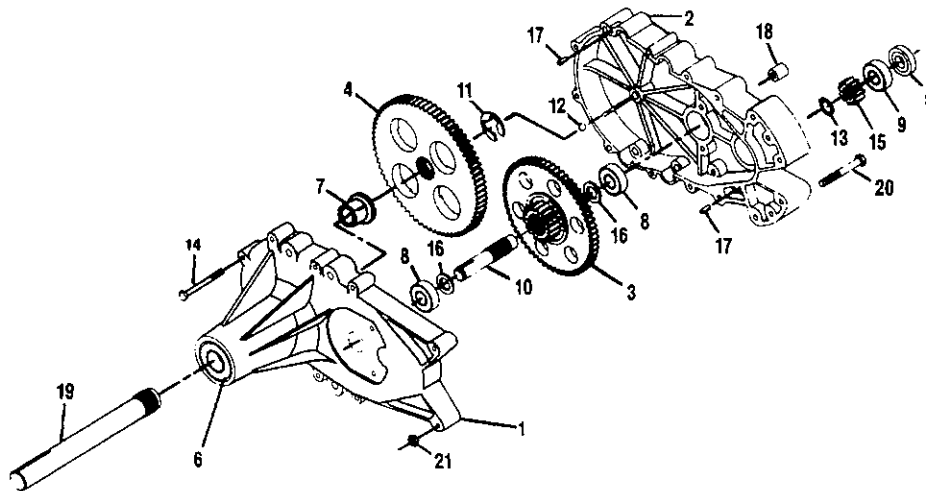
A - DETAIL PARTS LIST FOR 166204
